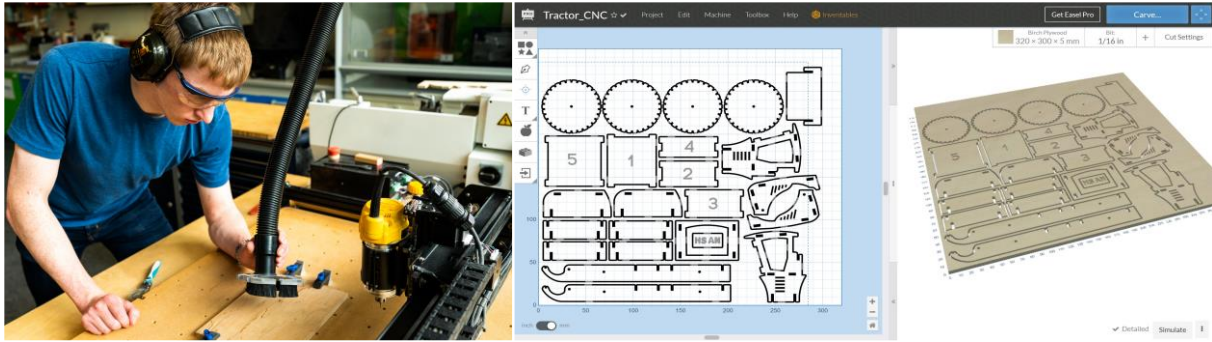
Student working with the CNC carving machine (left) and view of the browser-based software for the milling machine (right)
